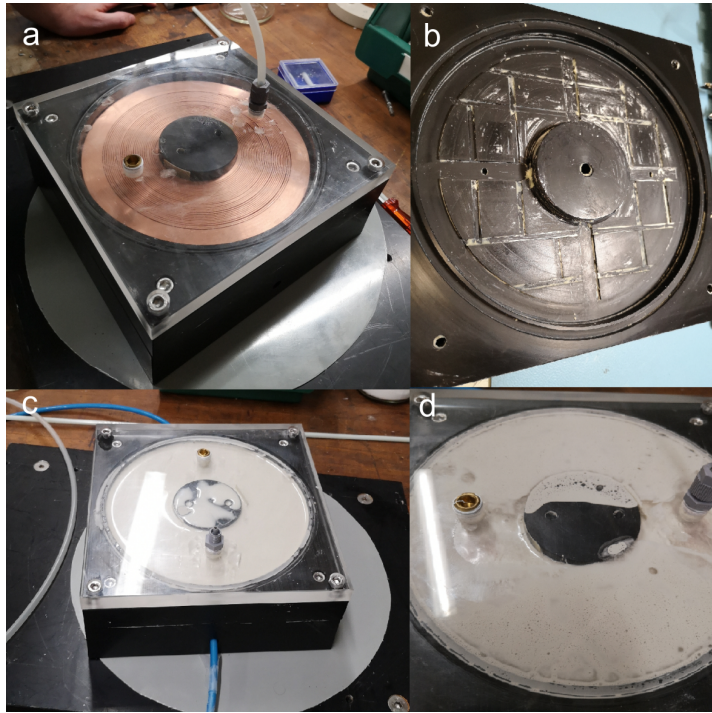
The gluing procedure for bulk-machined electromagnets.* a The coil after wire electroerosion machining. Fiber glass spacers are inserted in between consecutive turns along the spiral. It is then placed in a plastic mold hermetically closed with a plastic cap and orings. b The mold is machined with ridges on the bottom face to allow the epoxy to spread on the entire bottom face of the coil. Two holes are drilled from the outside into these ridges to inject the epoxy. Wax is spread on the full inside face of the mold to avoid the glue to fix the coil in the mold after the drying stage. c A reservoir of homemade filled epoxy is connected to the bottom face of the mold (blue pipe). From the top, a scroll pump is connected in order to generate a primary vacuum of $\sim 10^{-2}$ mbar inside the mold. This permit the glue to migrate from the reservoir to the top side of the mold. d Once the glue has uniformly been injected in the structure, it is left 24 h in order to dry and solidify. Afterwards the mold (made of several plastic pieces) is dismantled and the bloc is machined to remove the excess of glue on the top and the bottom face and bring the inner and outer radius to the specified ones.
